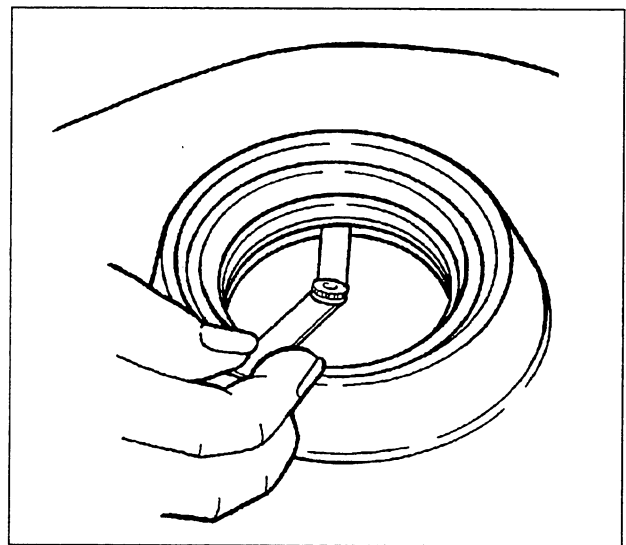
Checking for Contact Between Seal and Cover Bore
